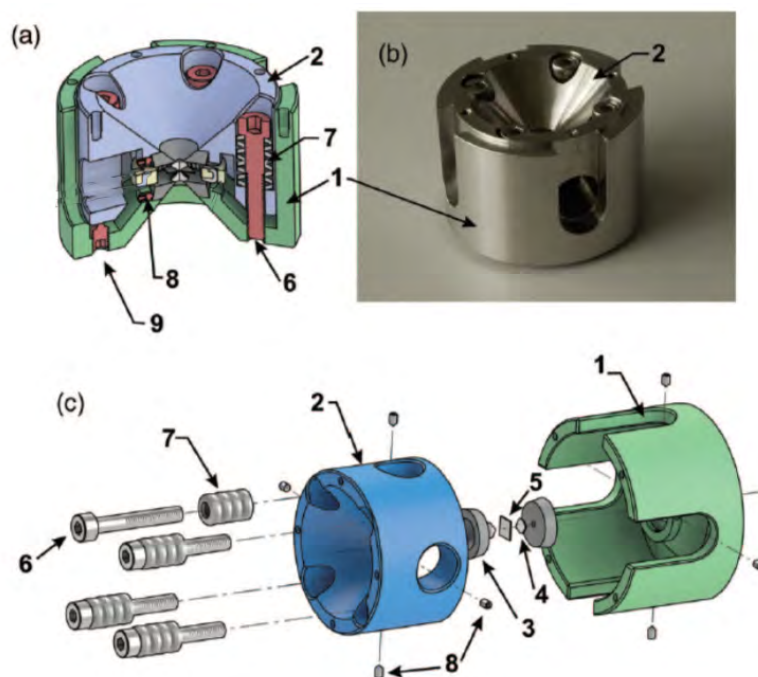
BX90 diamond anvil cell design, modified after [114]. (a) section view, (b) photograph and (c) exploded view with (1) outer cylinder part, (2) inner piston part, (3) diamond supporting plates, (4) diamond anvils, (5) metallic gasket, (6) M4 (#8-32 screws for generating loading force, (7) pack of conical spring washers (Belleville springs), (8) setscrews for diamond anvils alignment and (9) safety setscrews.
